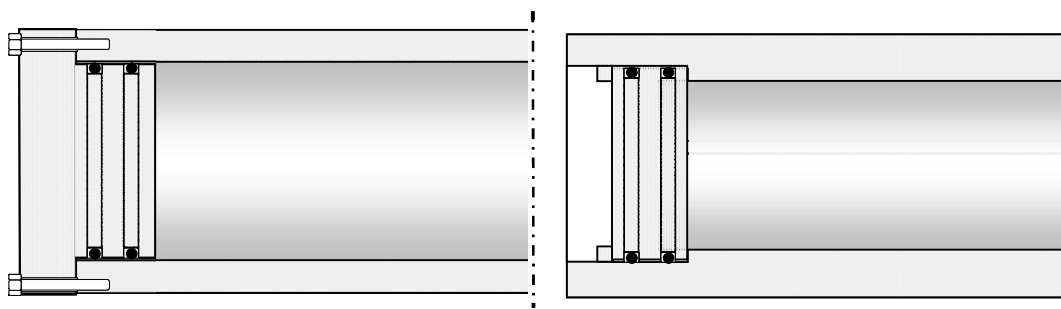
Insert lid container: Held in place by bolts (left) or by locking ring (right)
